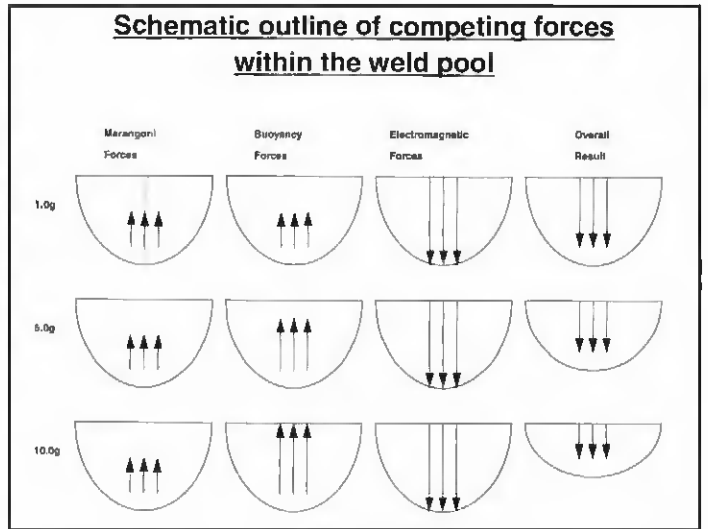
Schematic outline of the competing forces within the weld pool.
